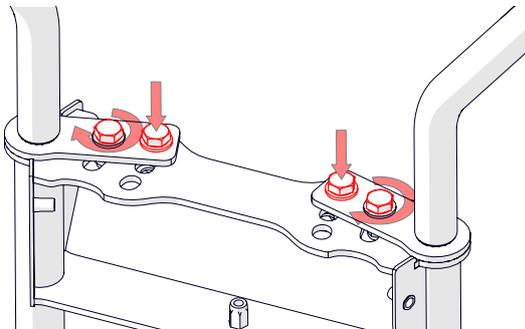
H - Insert bolts and tighten (top console removed for clarity).
